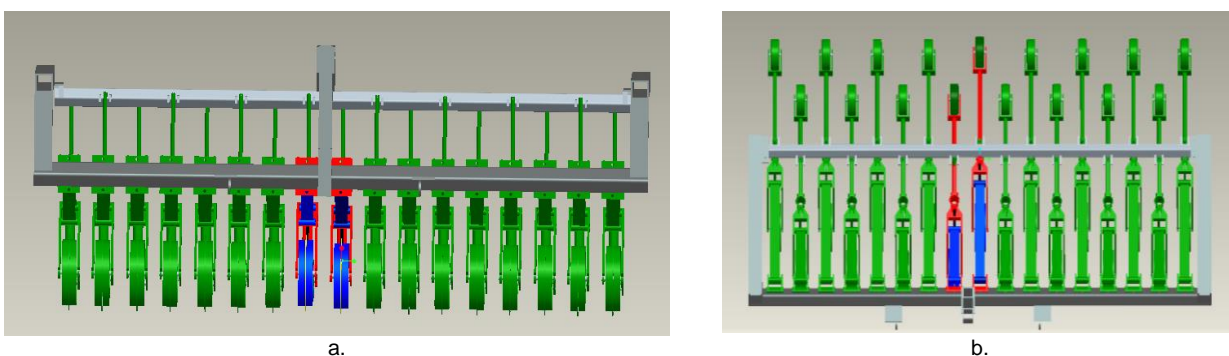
Position of the section with tensometric rings relative to body of machine [2]:
